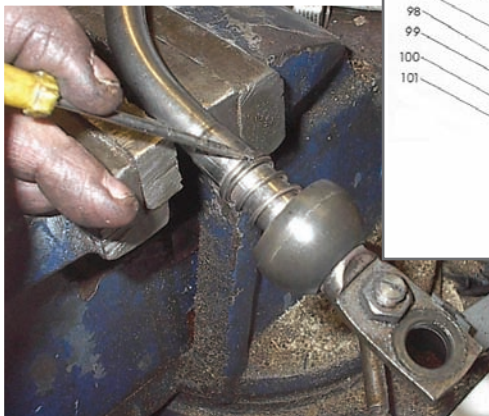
Undo the nut and bolt at the other end of the Extension Shaft and withdraw the Shaft.
